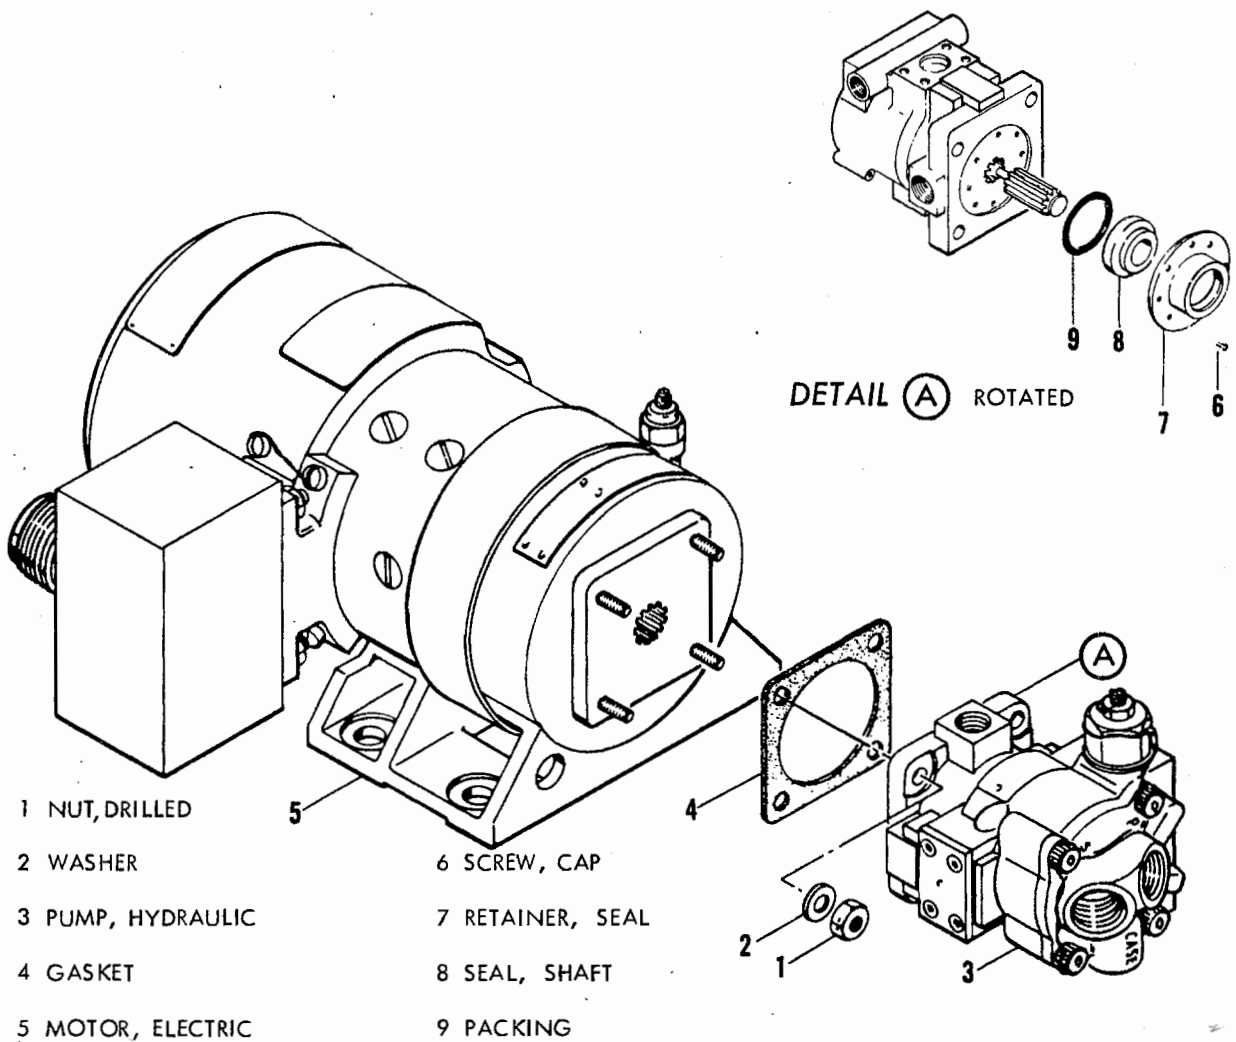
Motor-driven Hydraulic Pump Assembly
